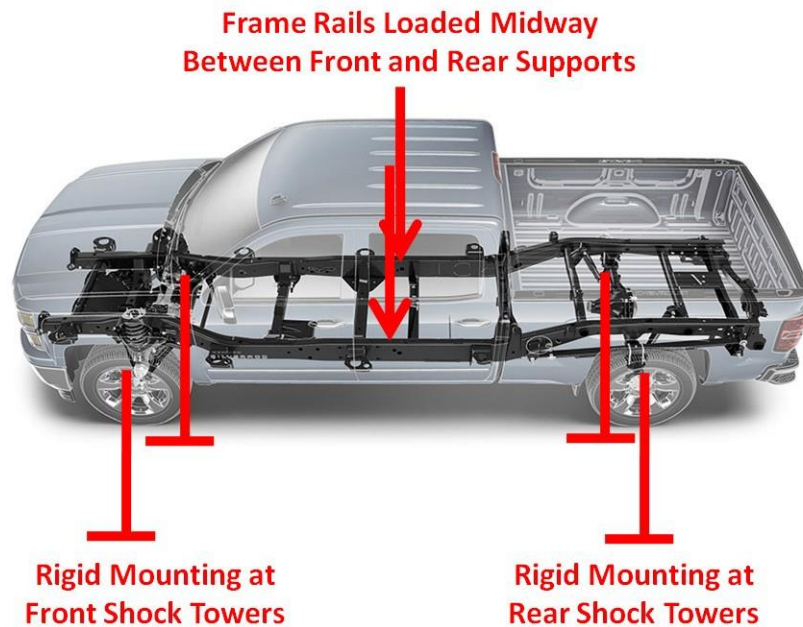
Vehicle Load and Mounting for Frame Loaded Bending Test
